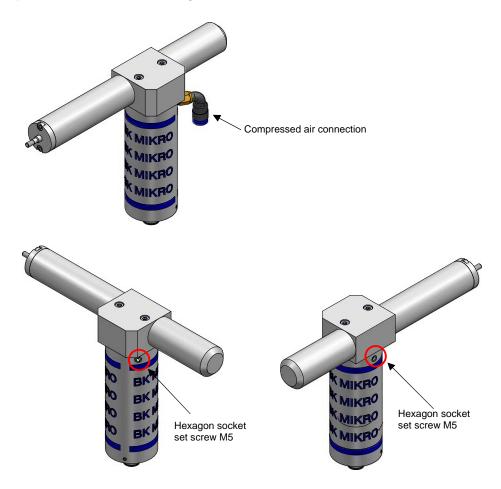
Option: compressed air balance TK9LIN50/100
